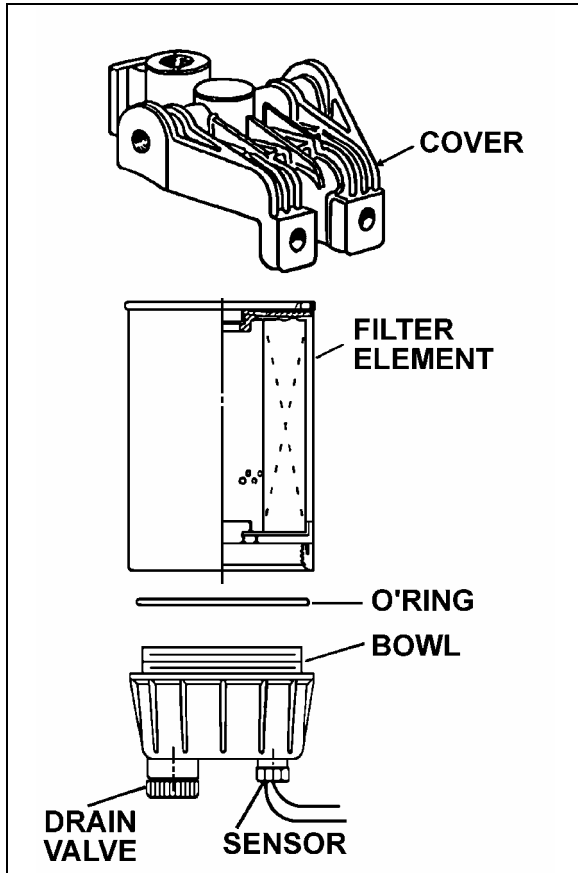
FUEL FILTER/WATER SEPARATOR 03025
